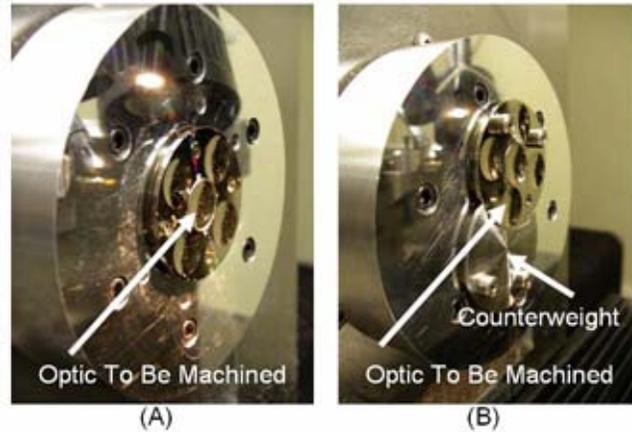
Metrology Artifact During On-Center Machining. (A) Shows the Machining of the Center Optic and (B) Shows The Machining of an Edge Optic Using a Counterweight.
